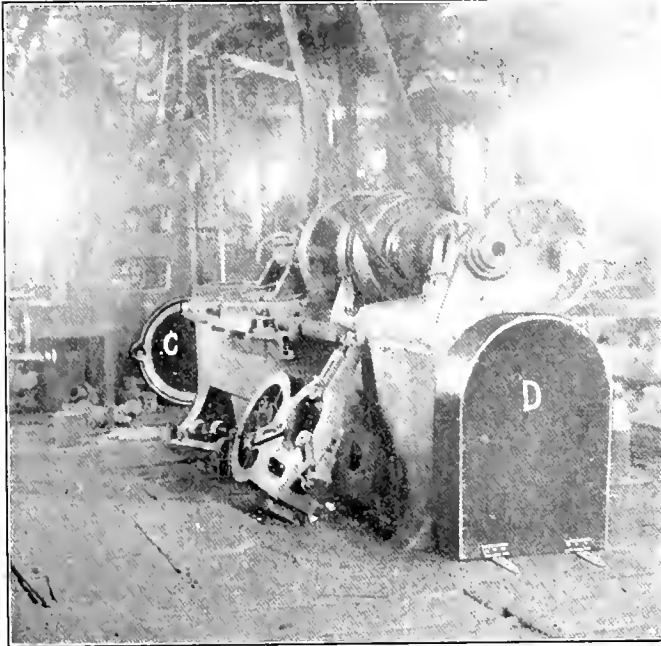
Safeguards Covering the Gears on a Lathe and Planer.
